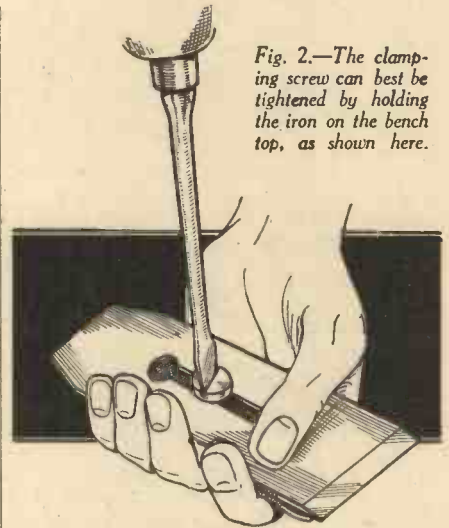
The clamping screw can best be tightened by holding the iron on the bench top, as shown here.
